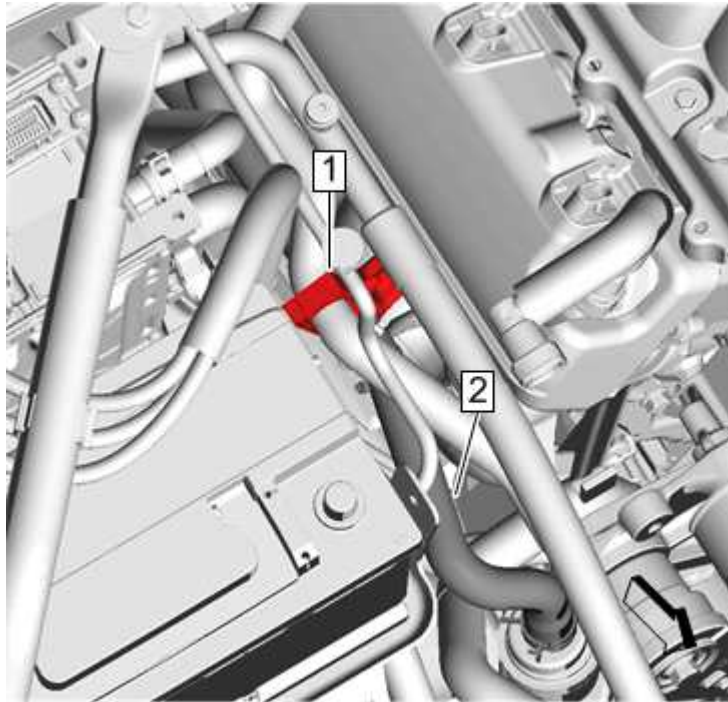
Heater Outlet Hose At Heater Inlet and Outlet Hose Bracket
